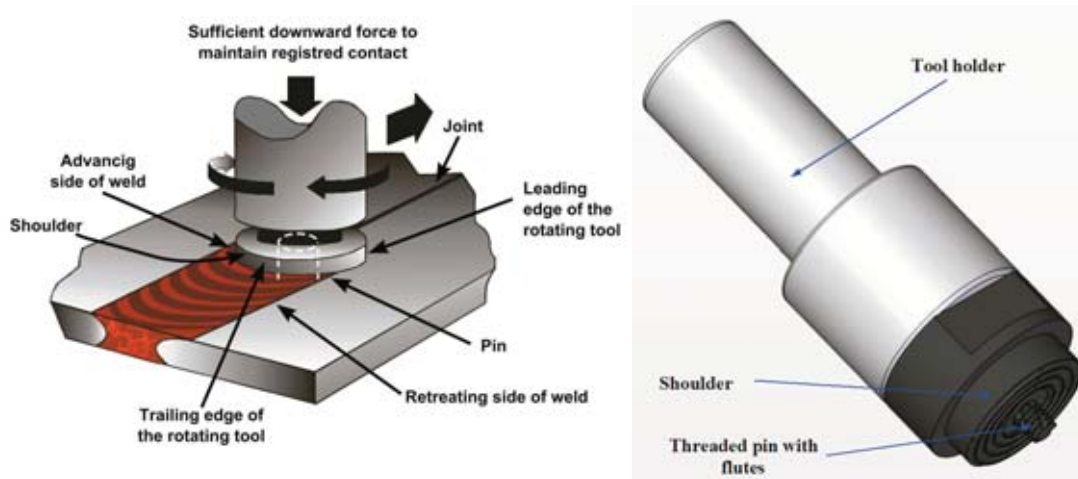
Schematic drawing of friction stir welding process and the tool
